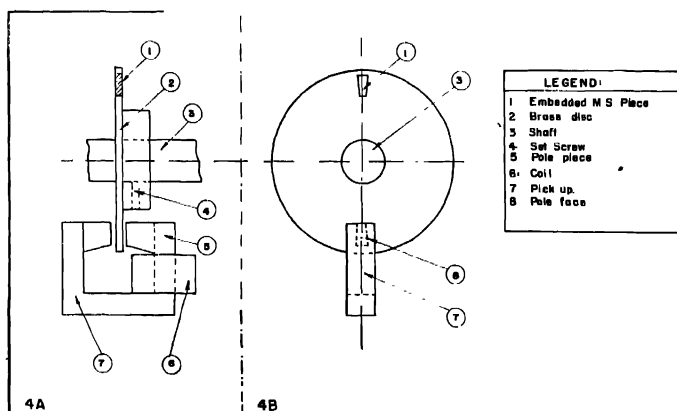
Modified design of disc and pick-up (A) Front elevation, (B) Side elevation
